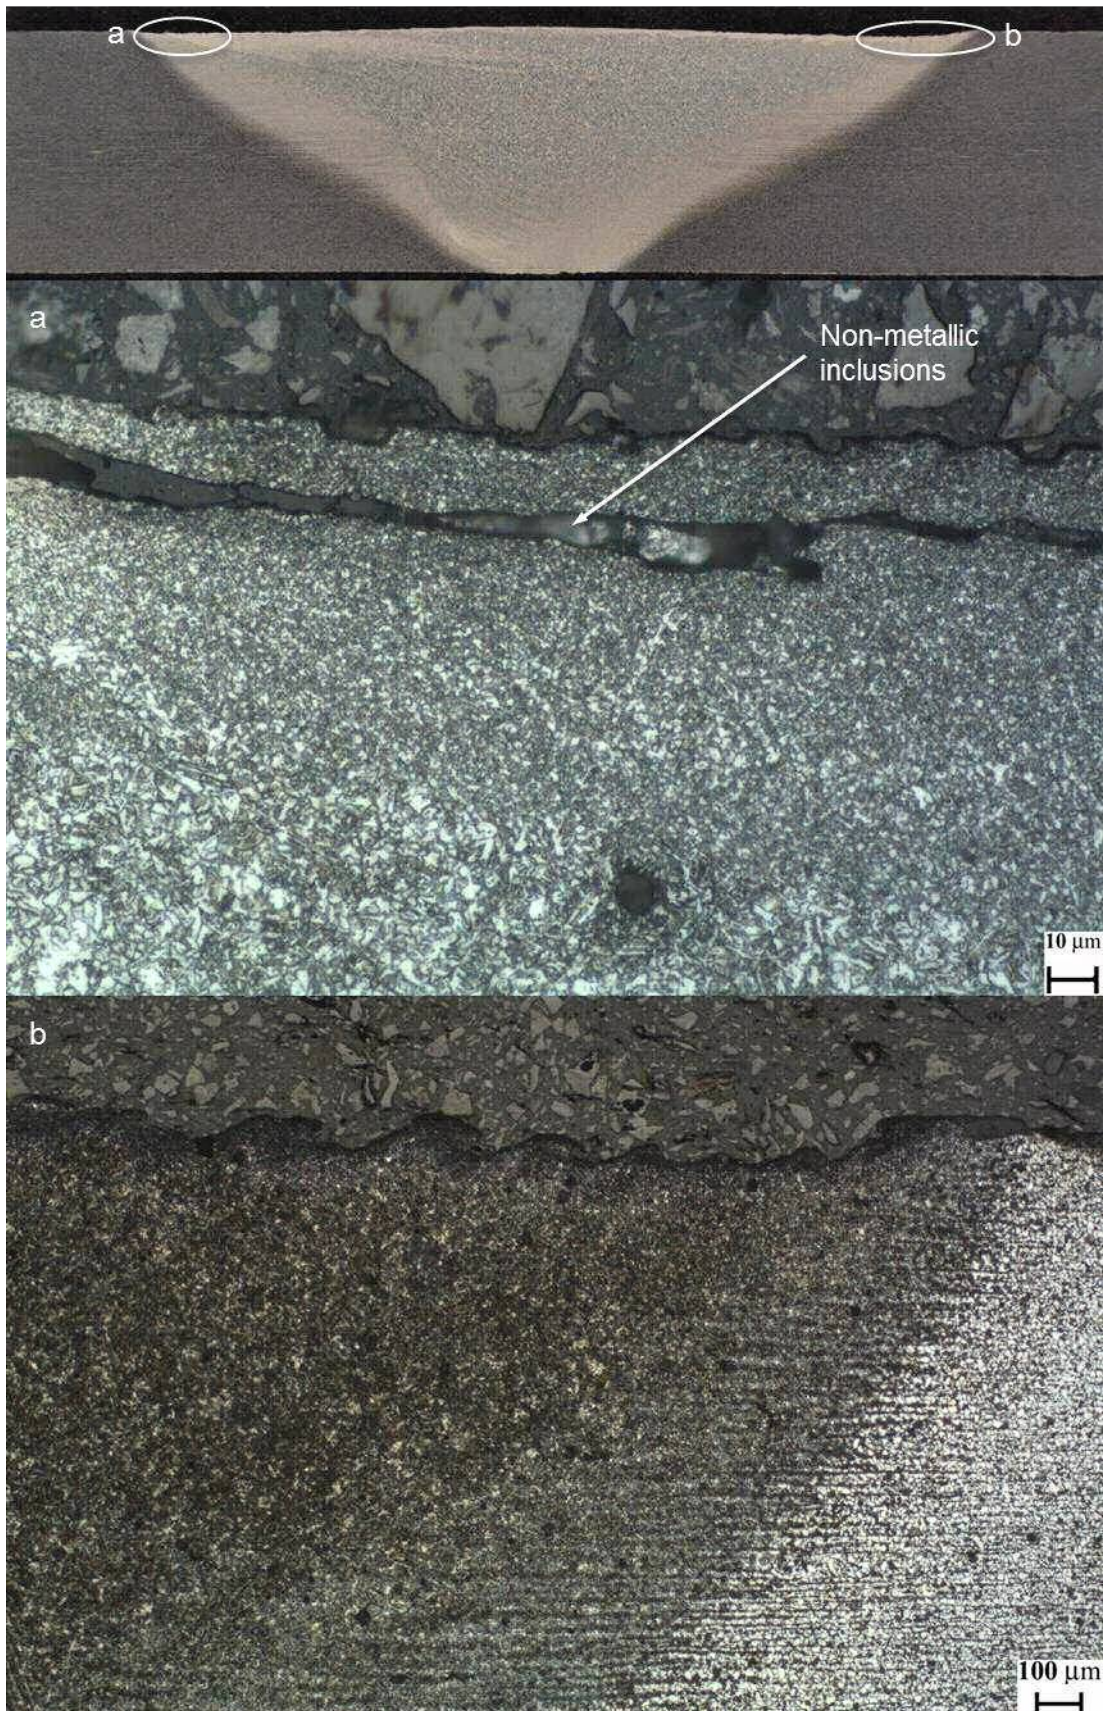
Fast weld, top surface (a) AD side [x500, Etched]; (b) RT side [x50, Etched]
